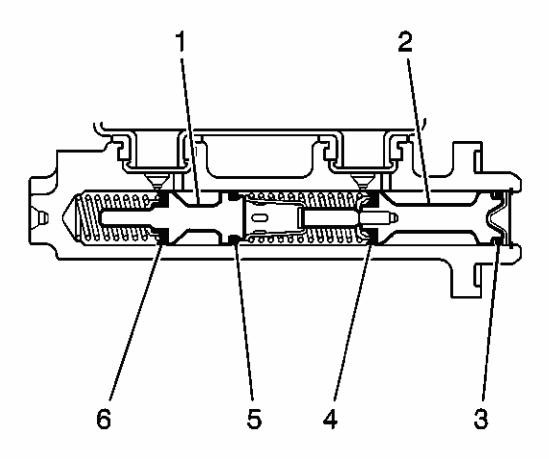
Cross Sectional View Of Brake Master Cylinder Courtesy of GENERAL MOTORS CORP.
